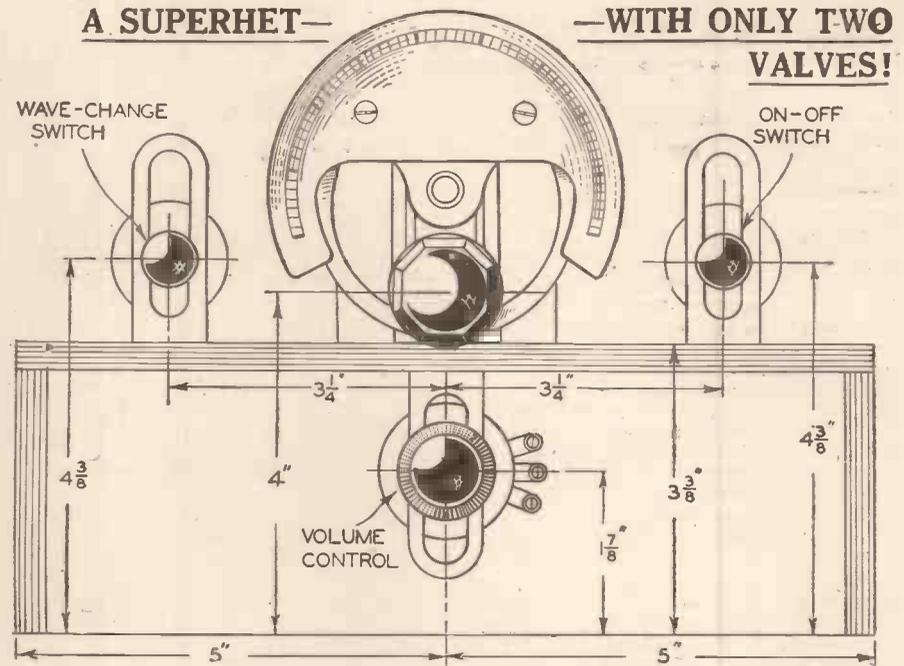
Control layout which will assist in drilling the cabinet front.
